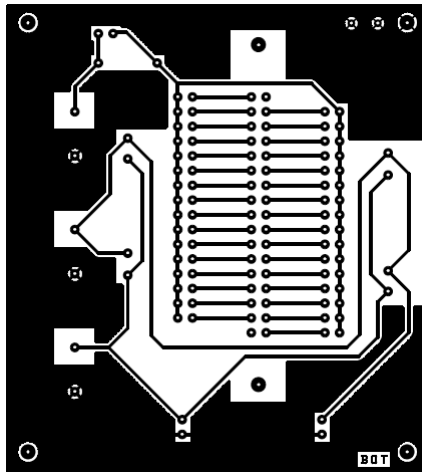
Layout of the bottom layer of a deviation PCB board.
